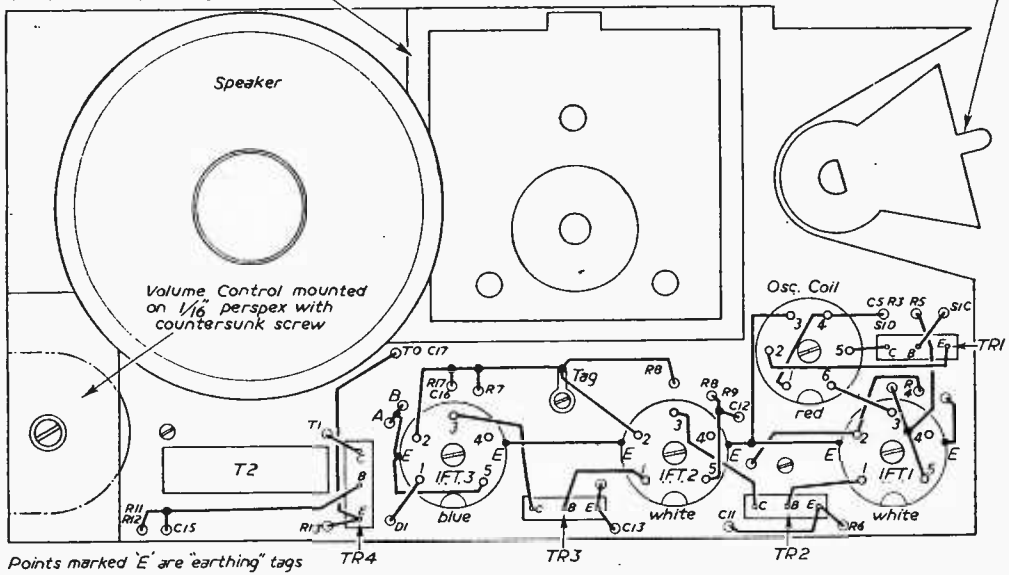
Top side of chassis showing wiring and approximate position of holes to be drilled for components. The wiring shown must not be more than 3/32 in. above the chassis.
